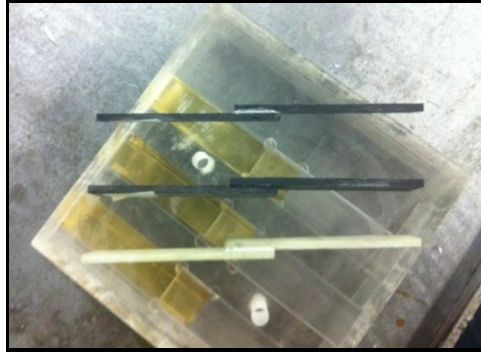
Typical graphite/epoxy and glass/epoxy single-lap joint specimens.
